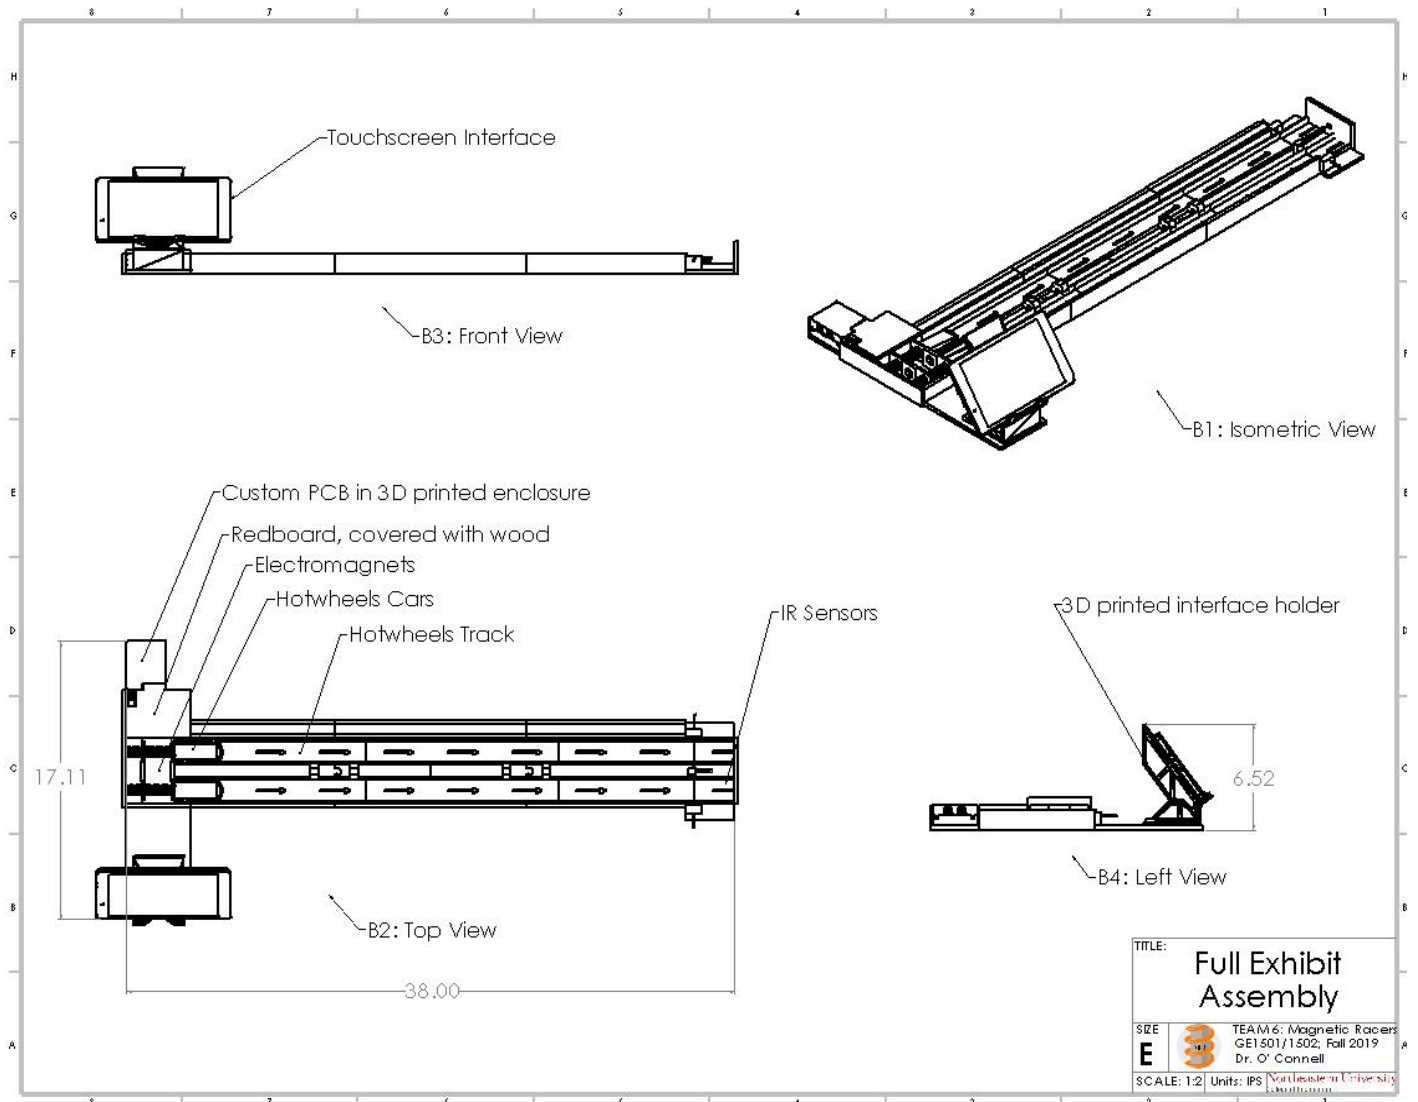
Solidworks drawing containing Isometric, Top, Front, and Left View of what the fully assembled exhibit looks like.
